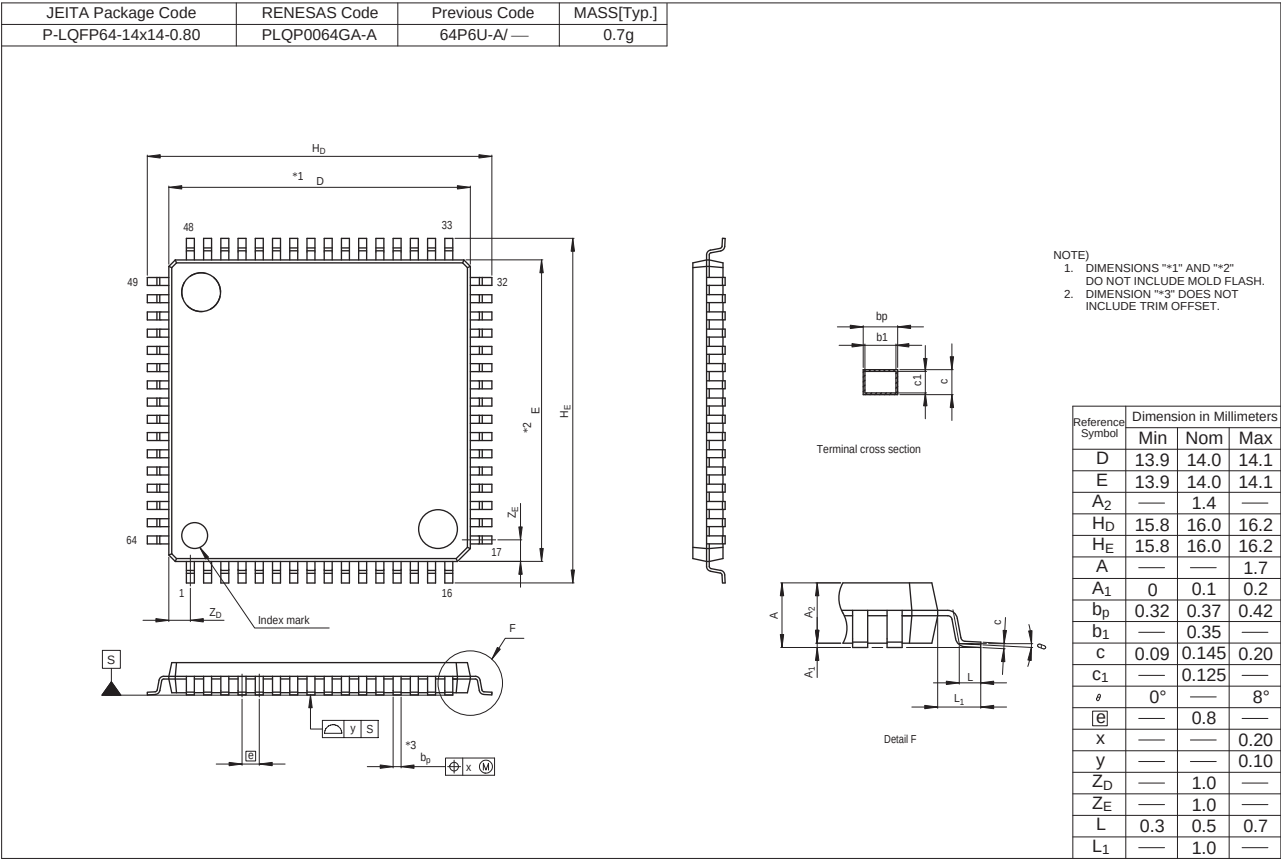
Pin LQFP (PLQP0064GA-A) Package Dimensions
